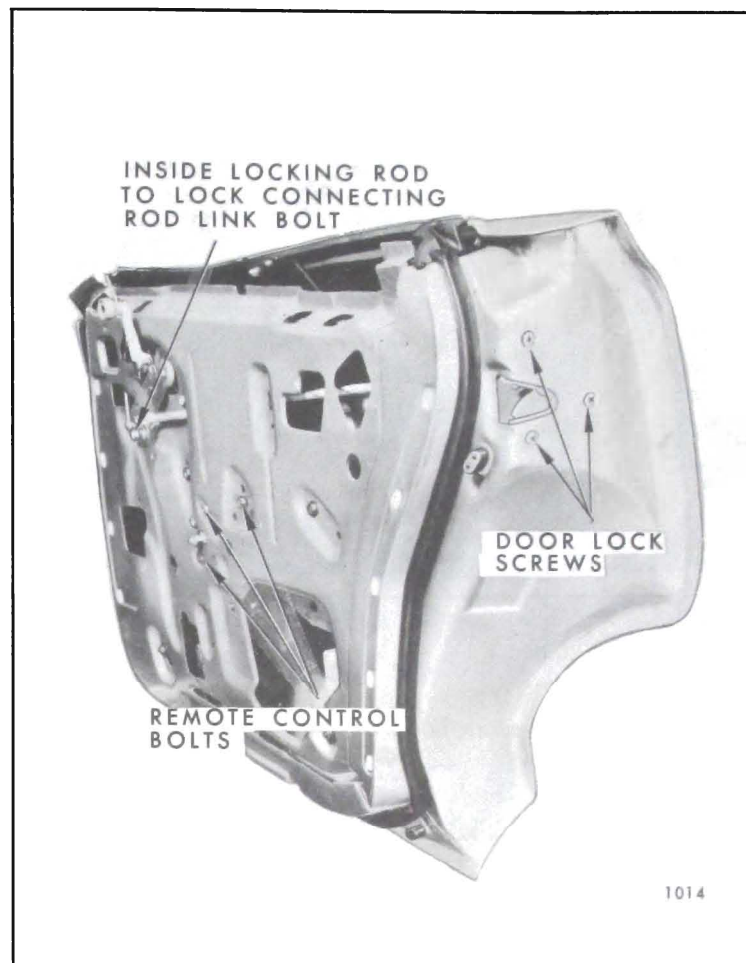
Rear Door Lock Removal - Hardtop Style
